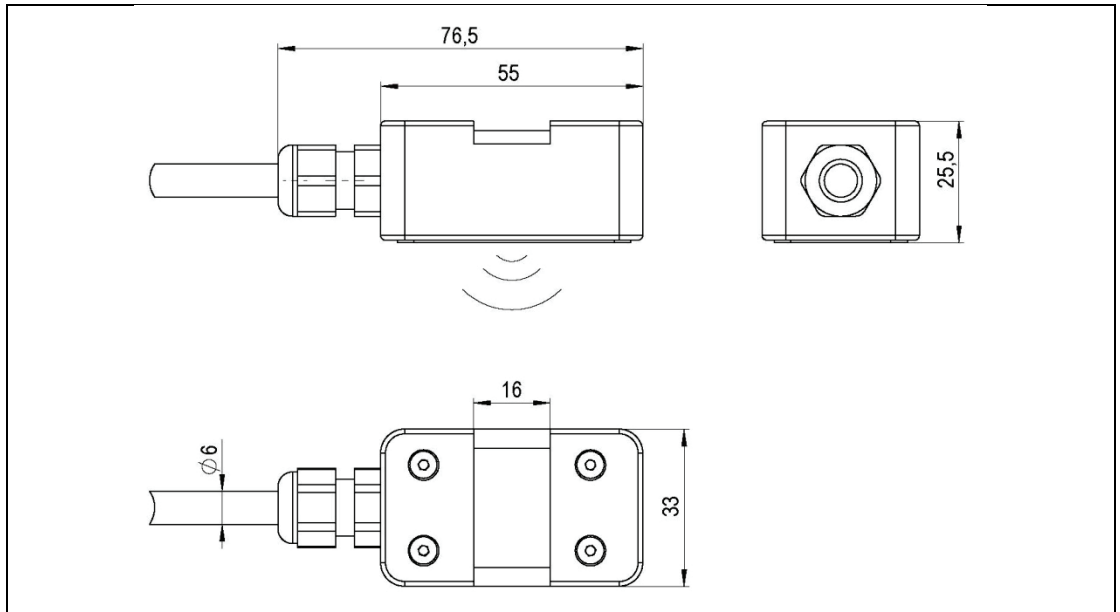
Dimensions Clamp-on sensor, type NIC-CO01
